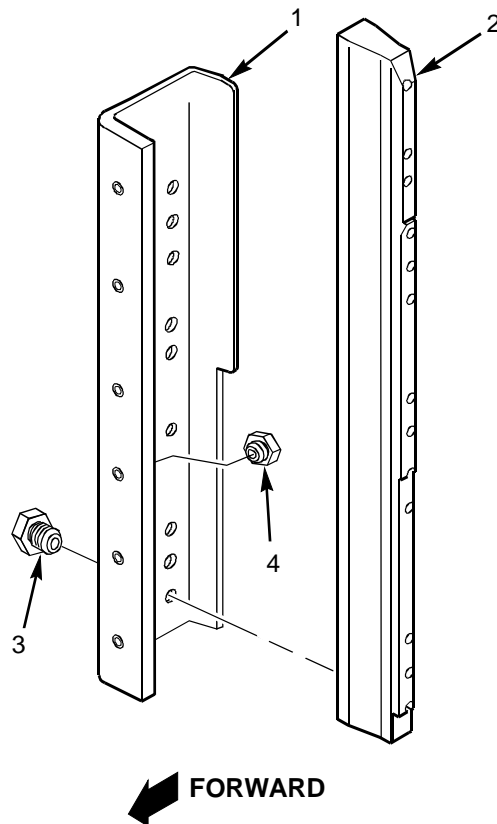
Left A-Pillar Reinforcement Installation (2 and 4 Door)
